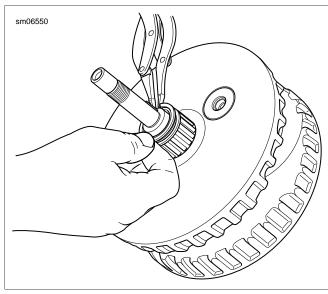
Installing Pinion Shaft Bearing and Retaining
